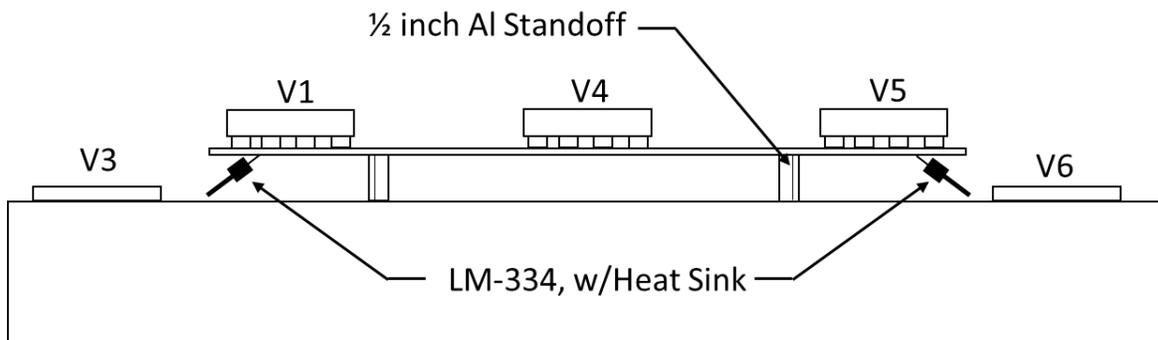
Front View Dyna-70 CCA with underside mounting of LM-334 & Heat Sink
